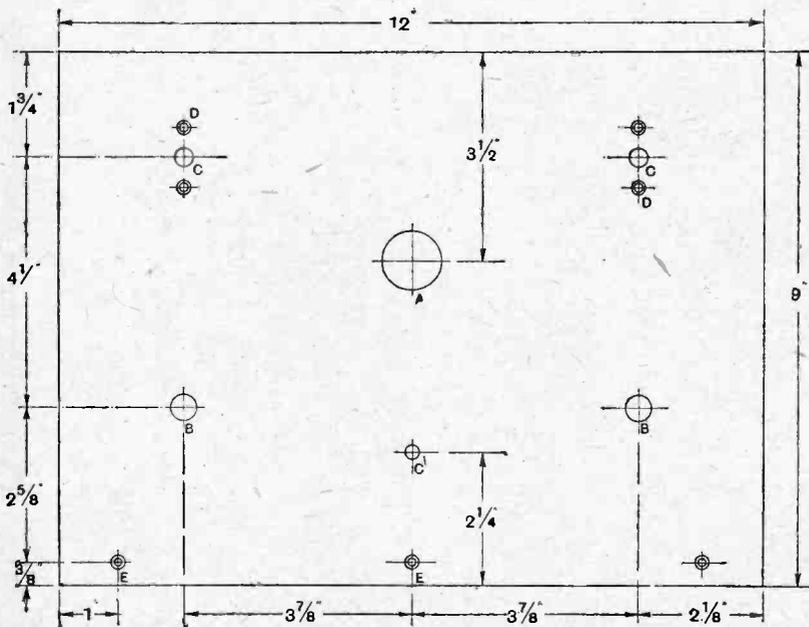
Scale drawing of ebonite front panel. A = 1 in. dia.; B =  $\frac{7}{16}$  in. dia.; C =  $\frac{5}{16}$  in. dia.; D = 4 B.A. clearance holes, and countersunk; E =  $\frac{1}{8}$  in. dia., for No. 4 wood screws.
